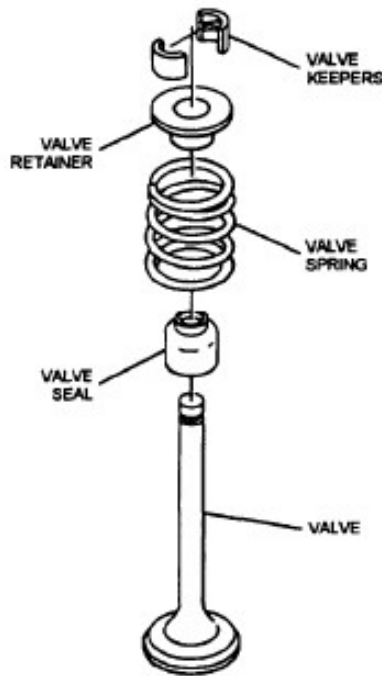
Valve spring assembly.[It Still Runs (2018)]
